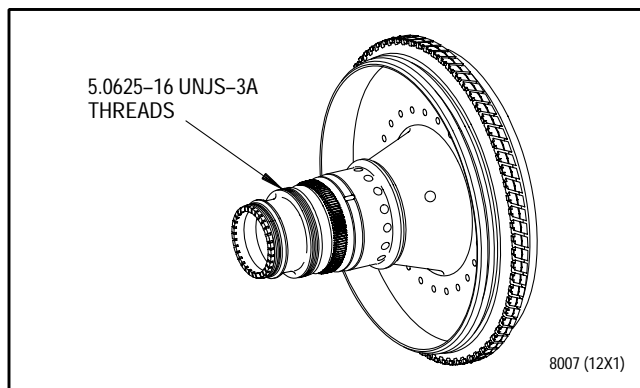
Sixth Stage Compressor Disk and Hub Assembly - No. 3 Bearing and Gear Assembly Retaining Nut Thread Repair
